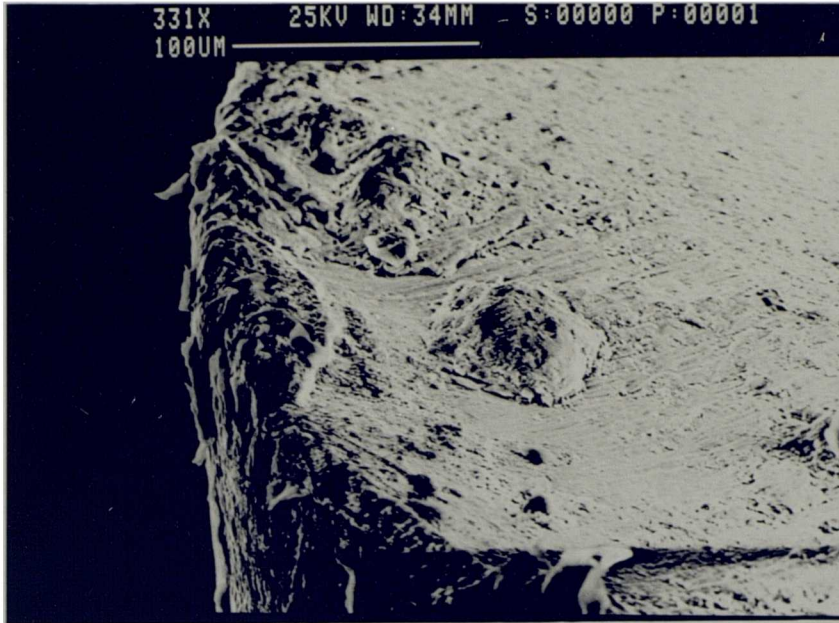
shows the condition of the rake face of a CBN insert after cutting for 10 minutes. Although gross wear of the insert has occurred due to fracture, it is still possible to clearly see part of a smooth worn crater on the rake face. Such wear, which is clearly similar in form to that of carbide tools, was most likely due to dissolution wear. The combined effects of the flank and rake face wear gave rise to an unsupported section of the cutting edge which lead to subsequent plastic deformation of the tool with increased cutting time (Fig 4.100). At this point the tool was rejected due to fracture after 11 minutes of cutting.
